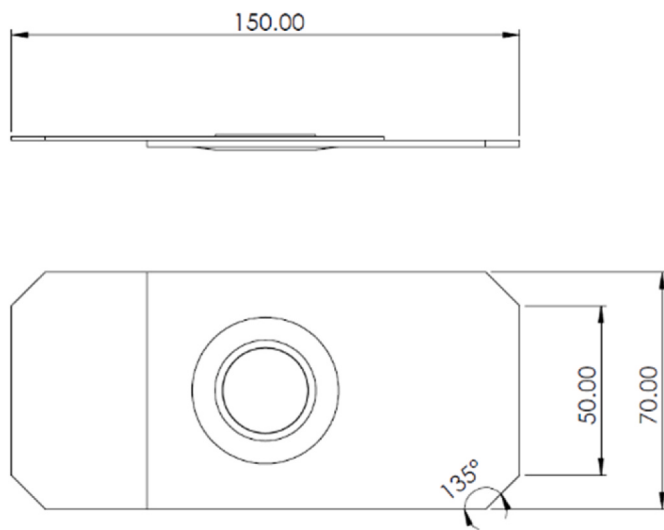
Joint and material strip cuts to fit clamping on copper blocks.
